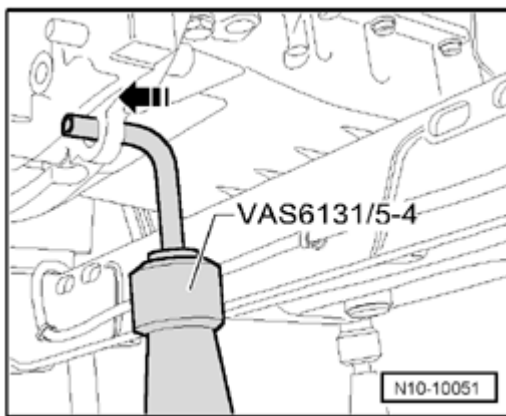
Angled Mounting Pin Of Support VAS 6131/5-4 Inserted Into Hole Of Oil Pan
